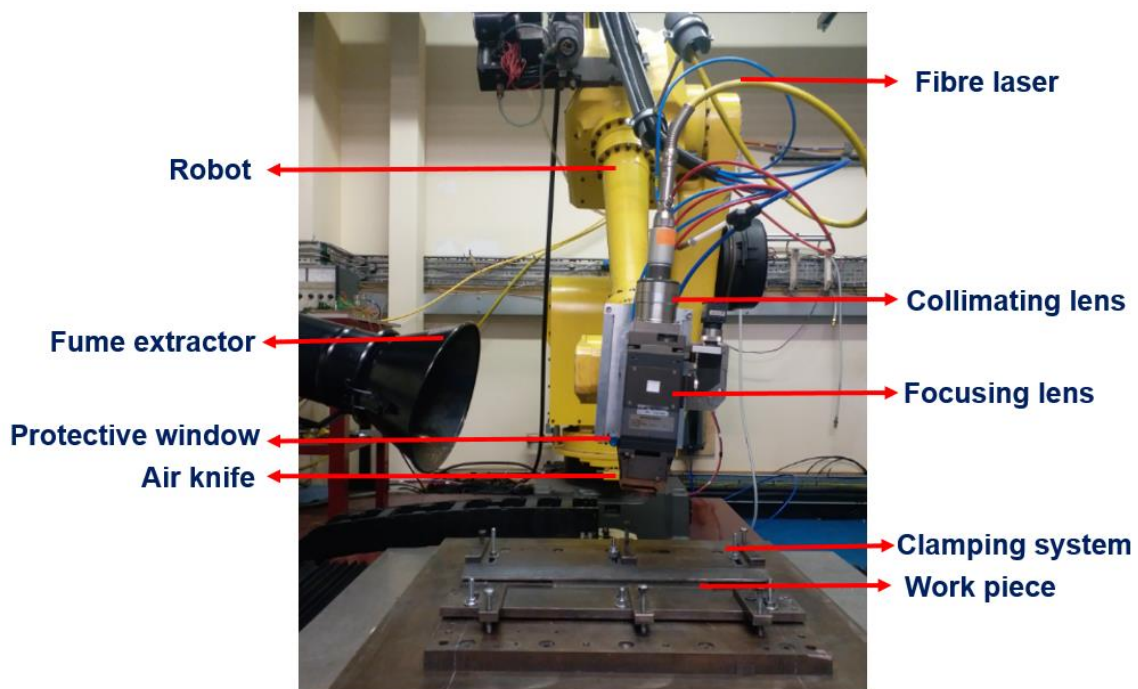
Experimental set-up – Autogenous laser welding system
